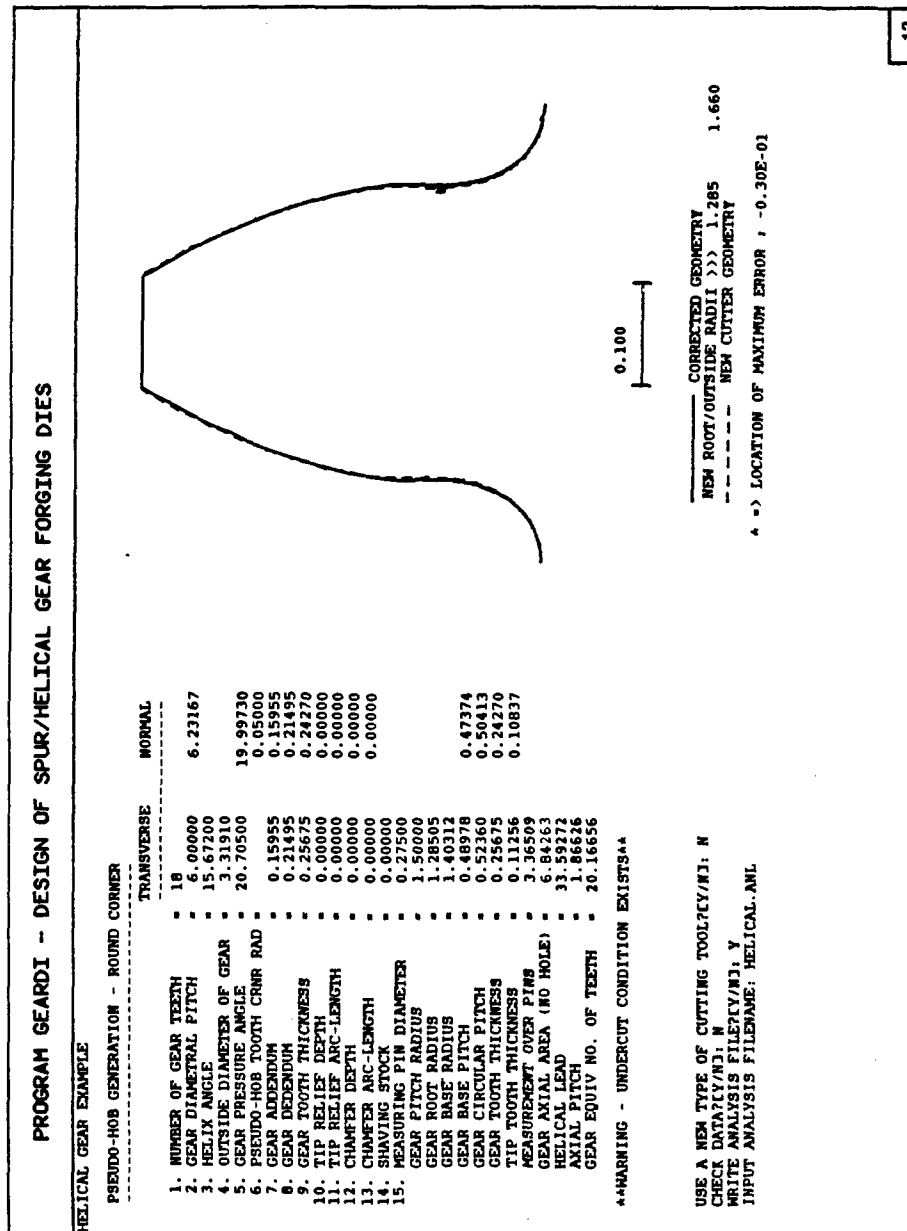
Helical Gear Example; Display of Corrected and New Cutter Geometry
